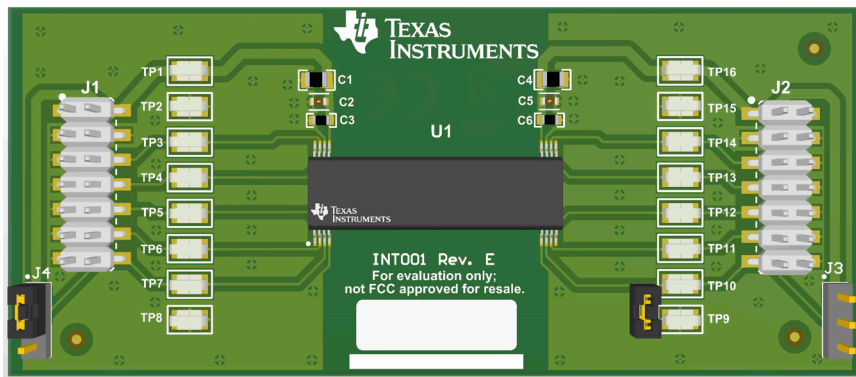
ISO7741UDUWEVM PCB 3D View - Top
